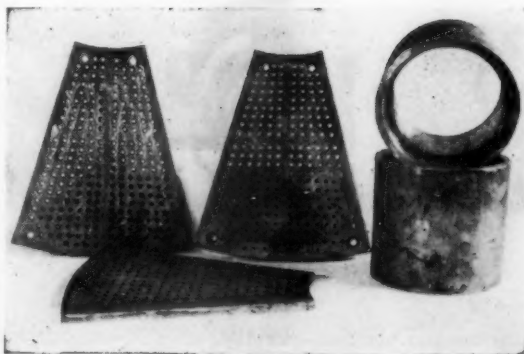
Ni-HARD SLEEVES FOR ROLL CRUSHER AND BOTTOM PLATES FOR PUG-MILL USED FOR CRUSHING SILICA STONE IN A REFRACTORY PLANT.
